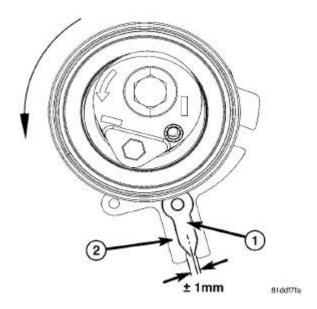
Tensioner Indicator & Tensioner Gage Slot Courtesy of CHRYSLER LLC
